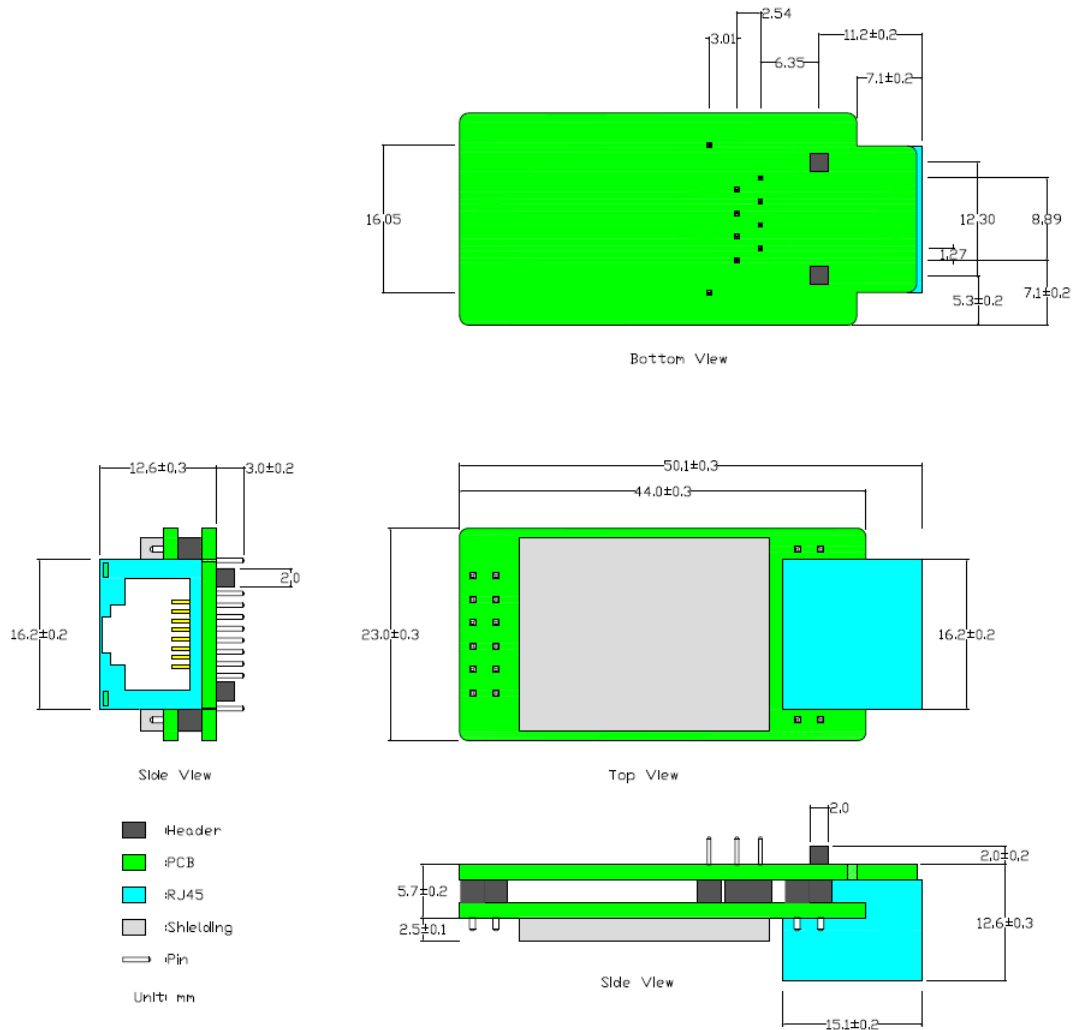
Eport Pro-EP20-PIN Mechanical Dimension
